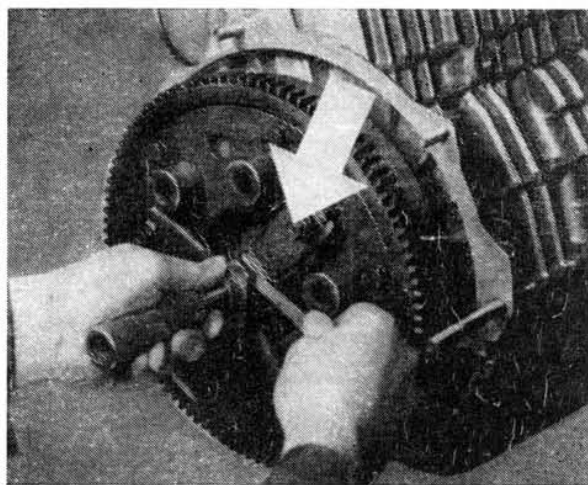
/1 - Checking Adjustment of Clutch Release Levers Using Checking and Centering Fixture
